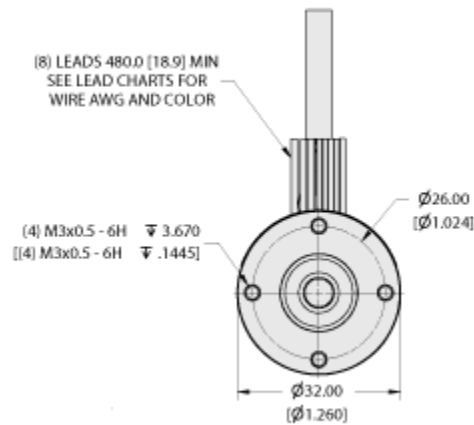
Outline drawing of the gearmotor LRPX32, front view[11]
